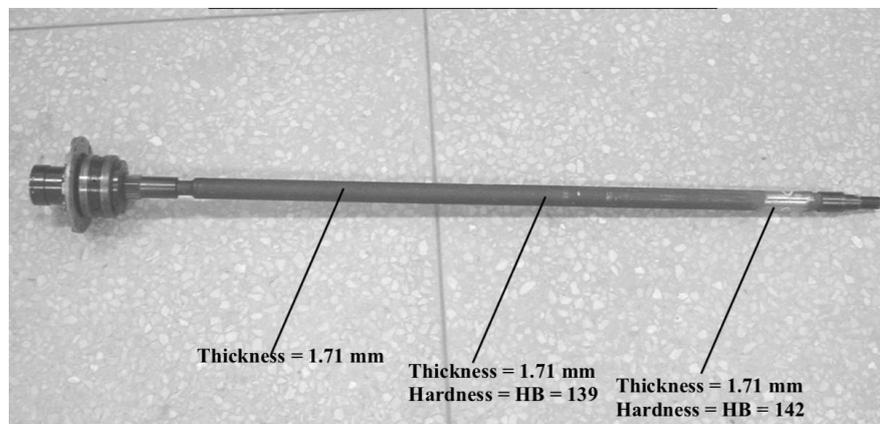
Hardness & Thickness Measurements of an Un-Fractured Piece
